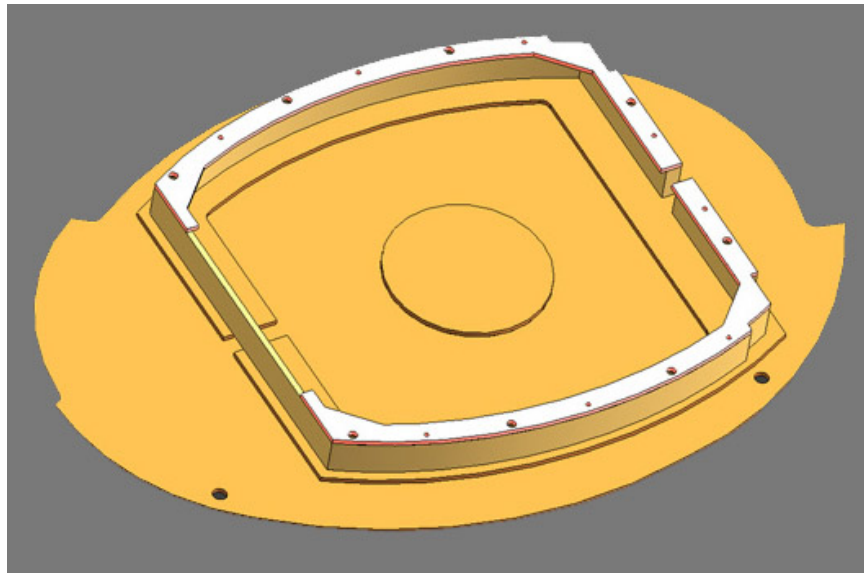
Rendered drawing of latest MSE Mirror 2 design showing all metal components. The mirror is held down around the entire perimeter, has zero glass to metal contact, is free of tensile stresses, and protected from impact. Drawings of the parts used in the latest incarnation of the MSE mirrors are included in Appendix B.
